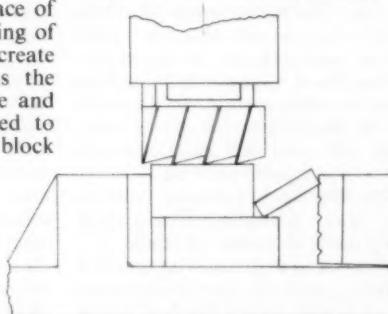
The use of a serrated jaw as shown here, gives an opportunity of using a clamping strip set angularly against the workpiece which pushes the detail down on the raising block
